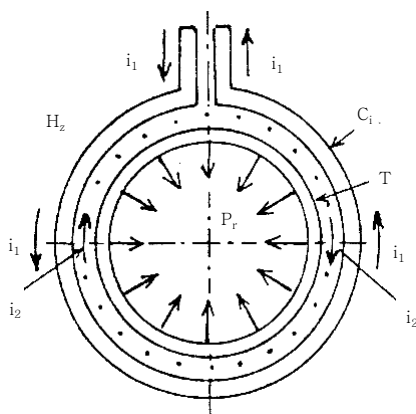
Principle of magnetic pulse welding⁵⁾
